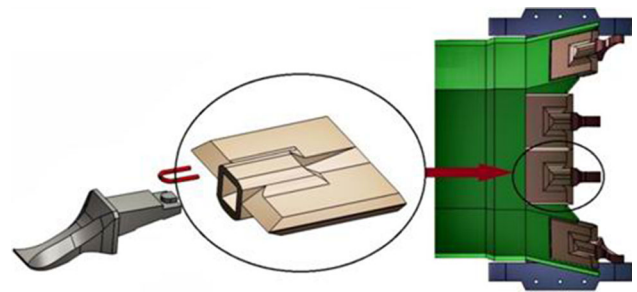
CAD models: cutting tooth, holder of cutting tooth and entire excavator bucket.
